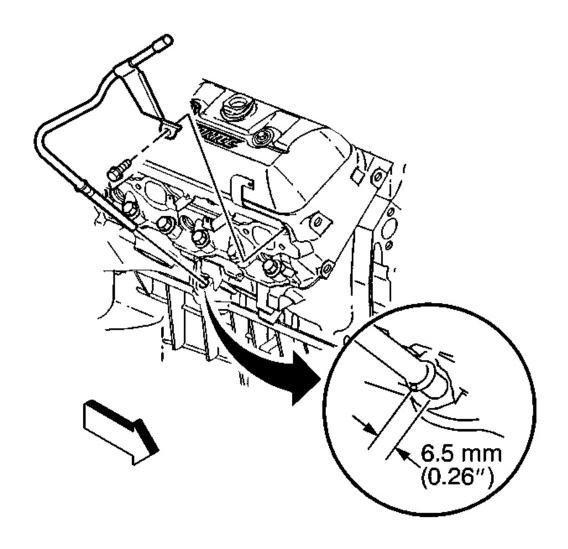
Oil Level Indicator Tube Sealant Courtesy of GENERAL MOTORS CORP.
